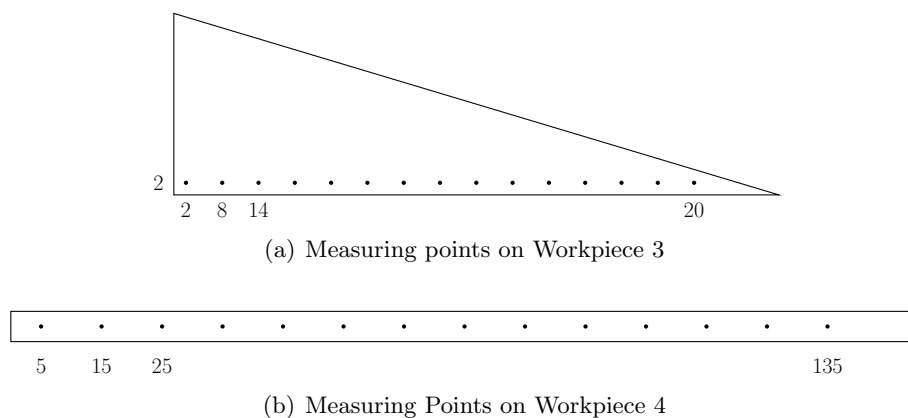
Positions of the measuring points in Workpieces 3 and 4 [mm]
